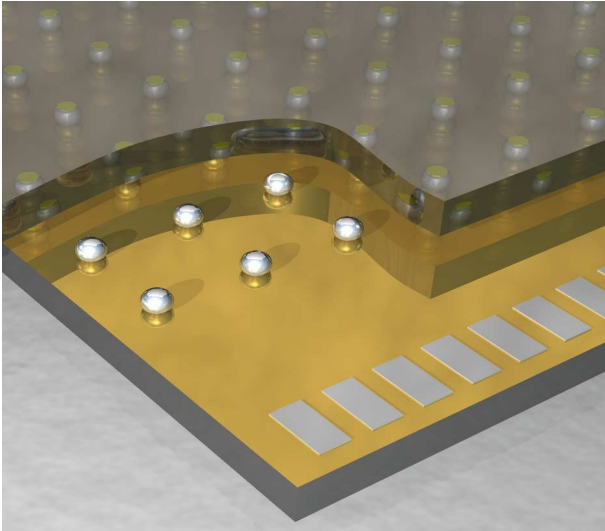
Schematic view of a bump bonded hybrid consisting of the sensor and the readout chip.
